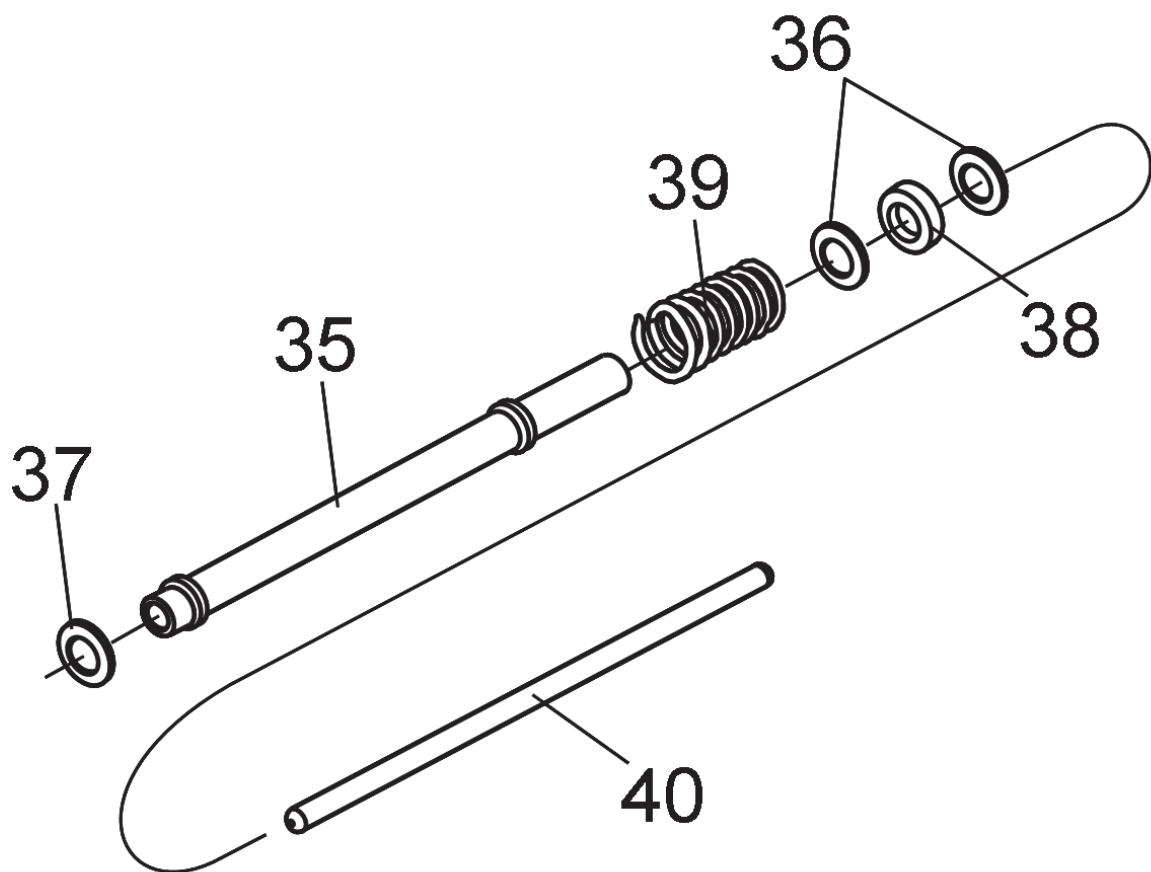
Crossflow Cylinder Pushrod Tube Assembly G N P R
